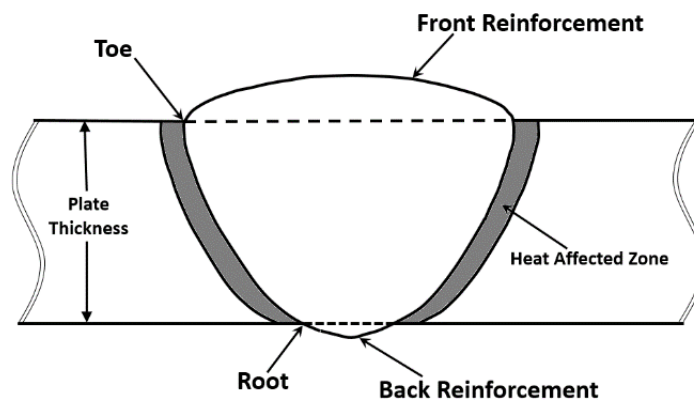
The weld reinforcements in butt welded joint.
